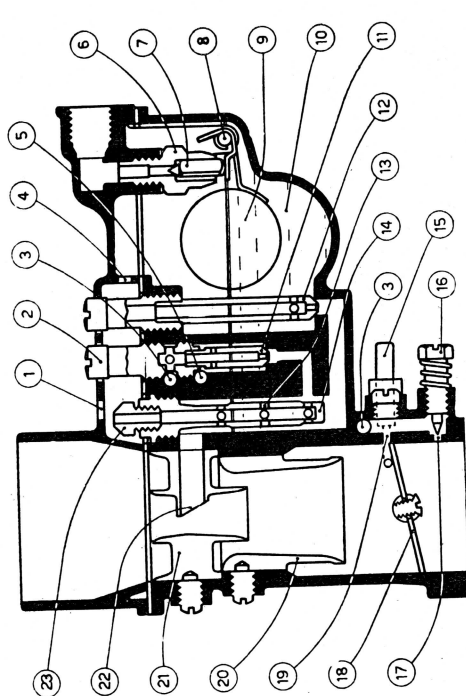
The Weber Single Downdraught Carburettor, Model DRSP.
